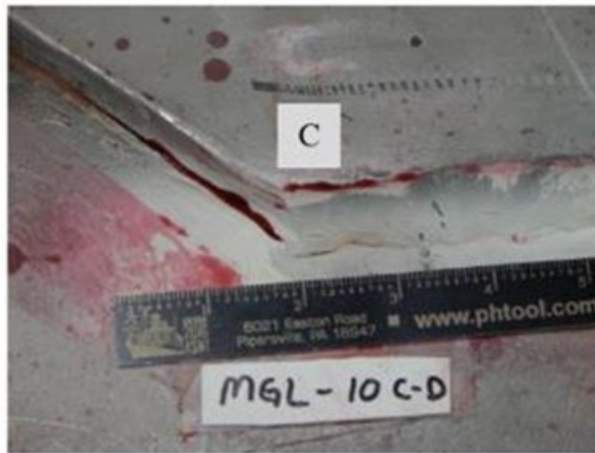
MGL-10-C-D simulated fatigue crack fillet weld MG panel
